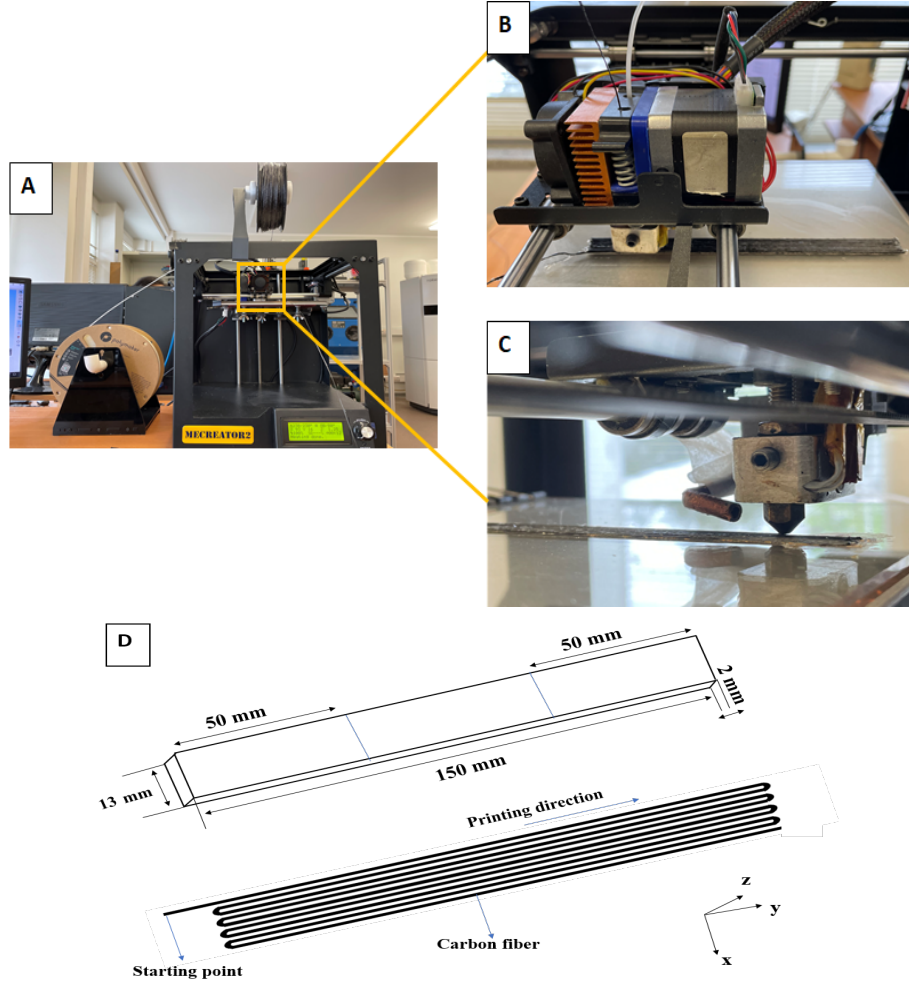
Modified FDM printer (A); extruder with two inputs (B); printing nozzle (C); and printed specimen configuration (D).
